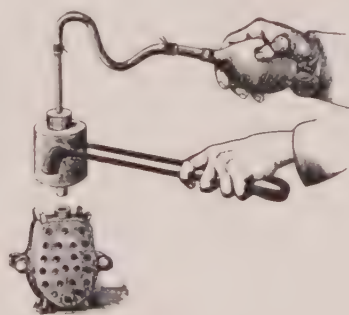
Dr. Carroll's Air Pressure Casting Machine, 1885-6.
